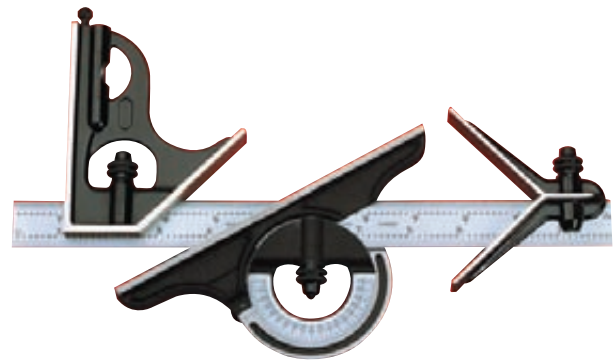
Machinist's combination set (Courtesy of The L.S. Starrett Co.).
